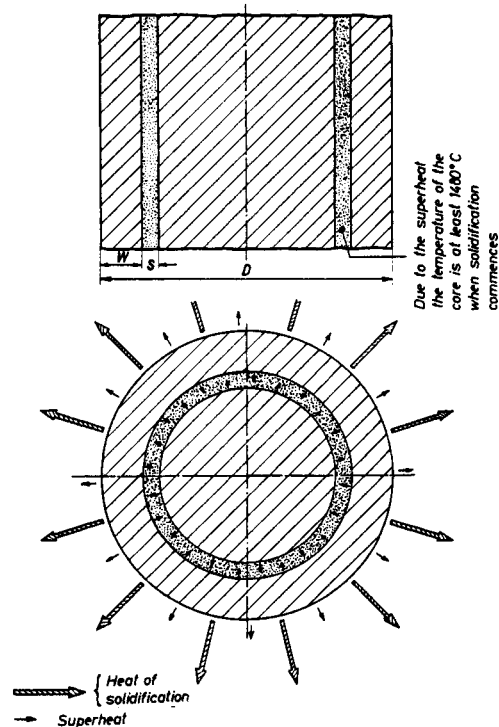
Thermal conditions in internal feeders inside tubular castings.
